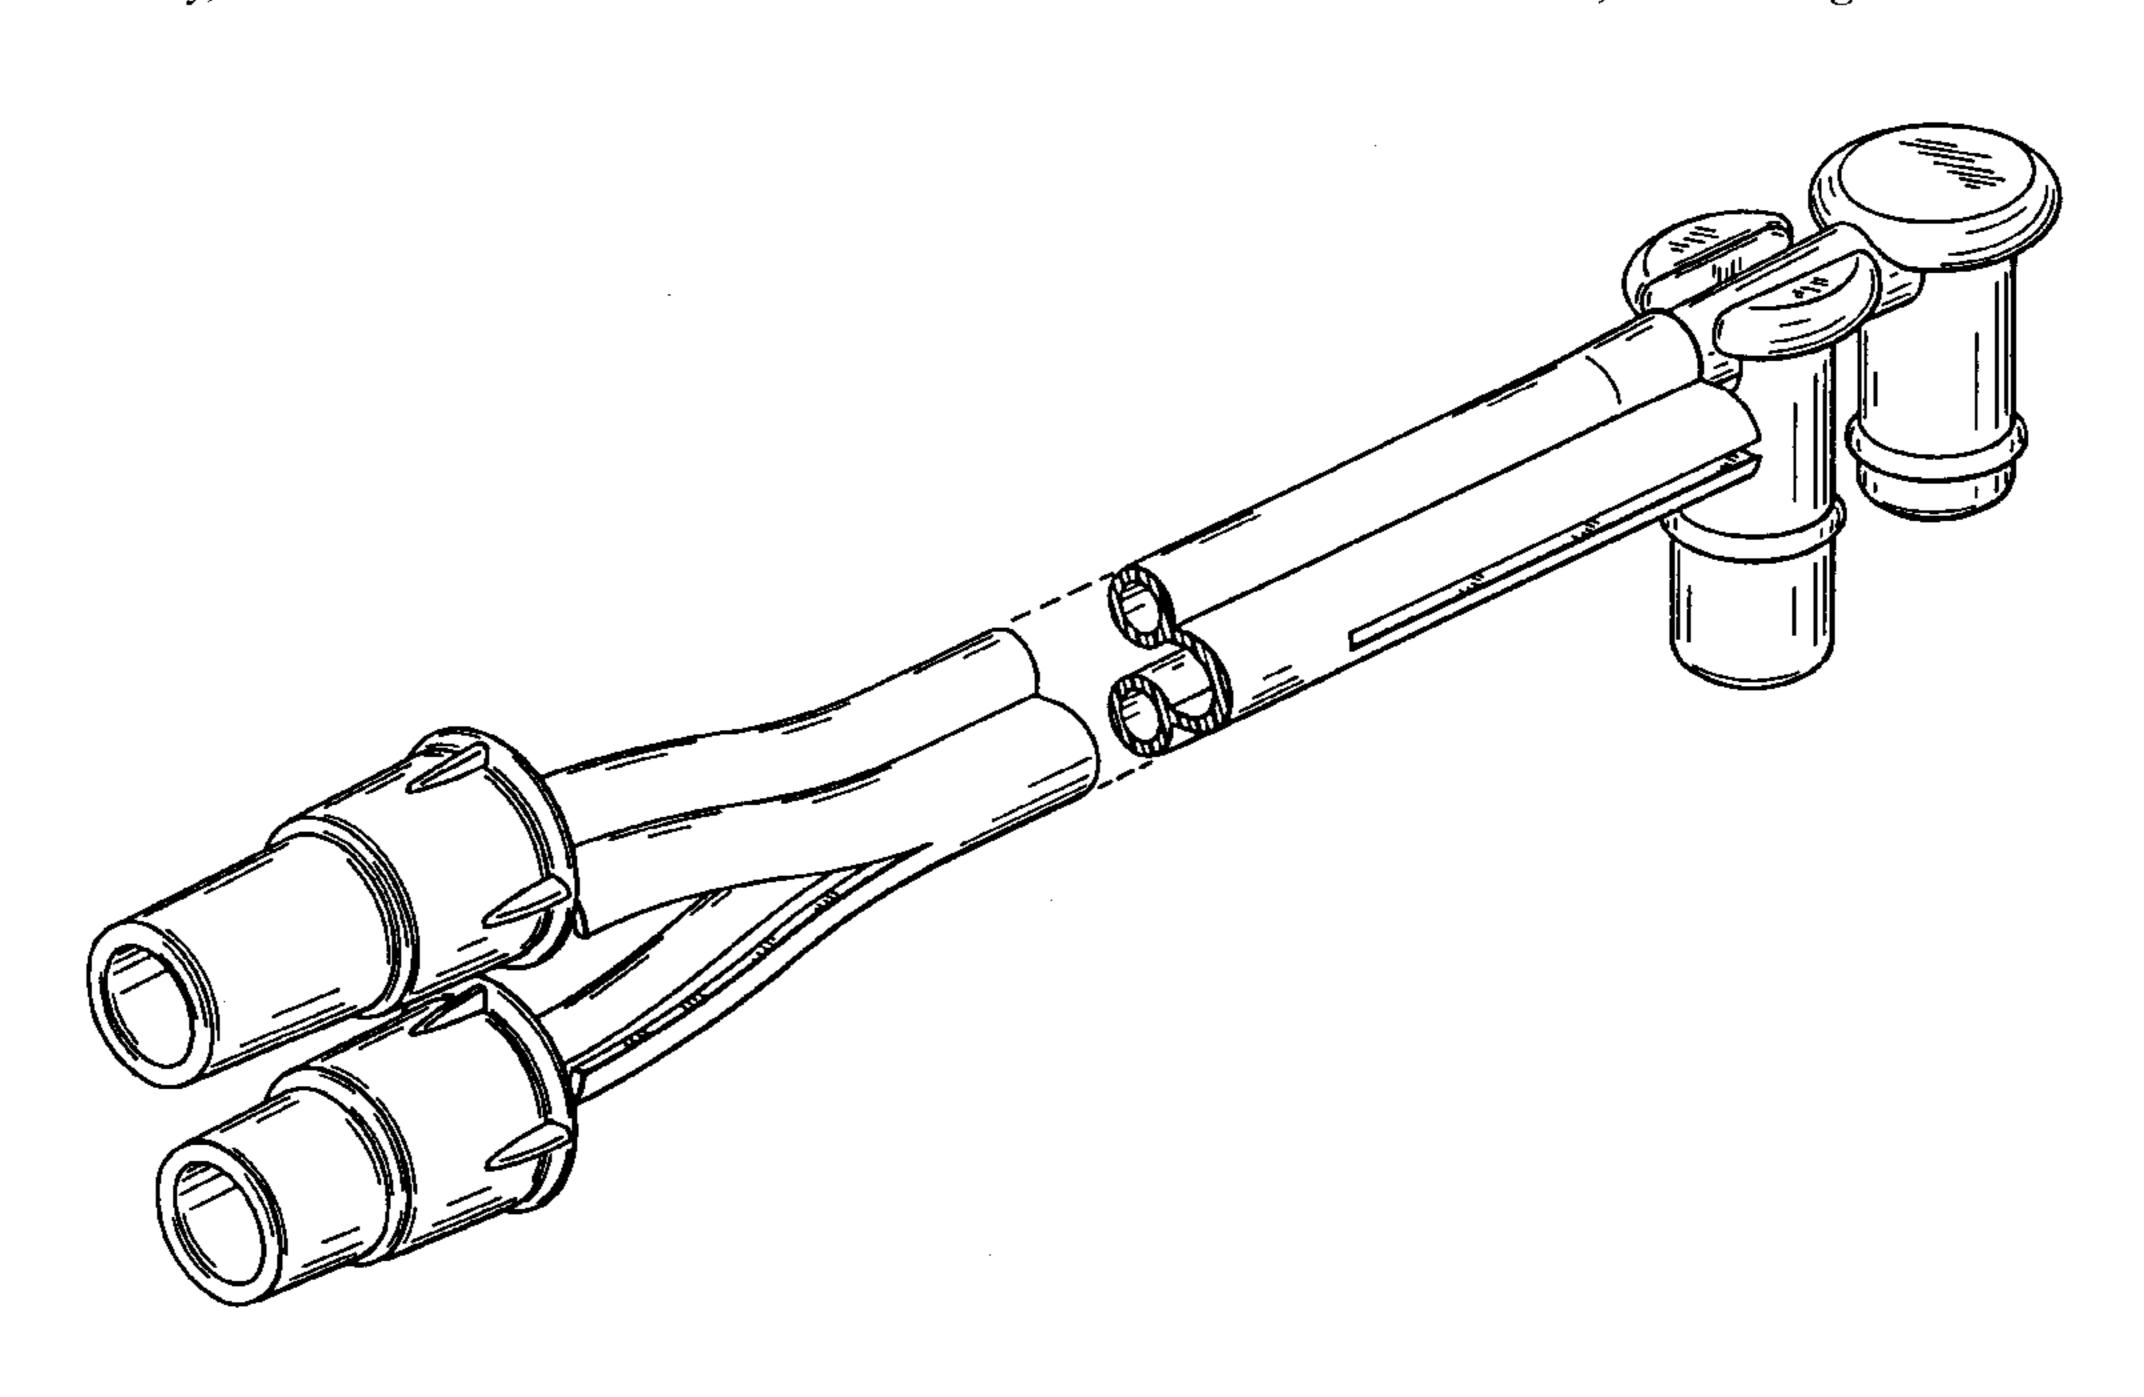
is a view of the other side of the spirometry tube and connector assembly;
